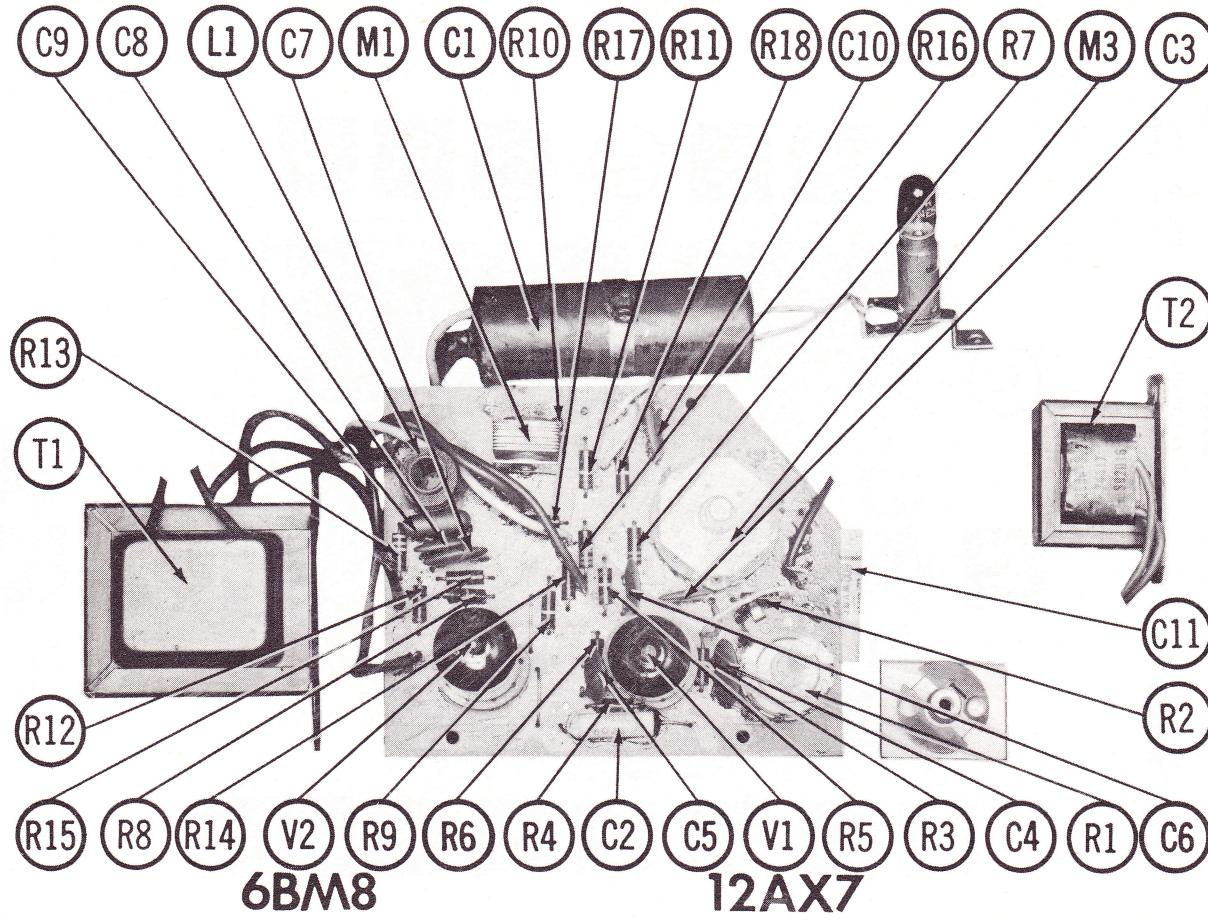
C EXPLODED VIEW OF PARTS BELOW MOTOR BOARD
